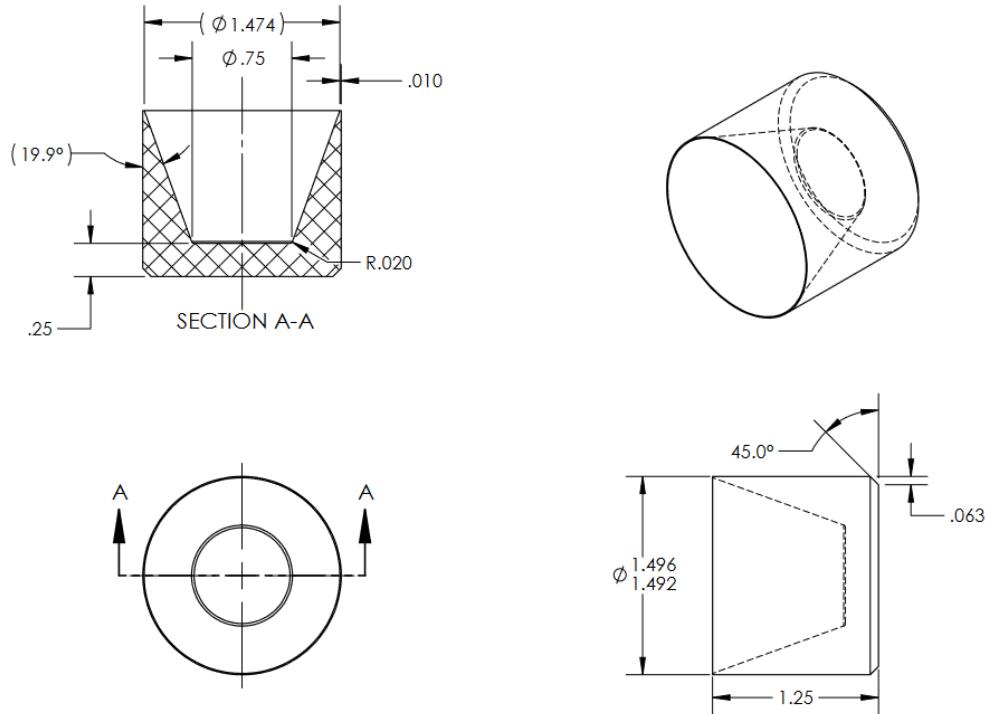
O101 obturator drawing (dimensions in inches).
